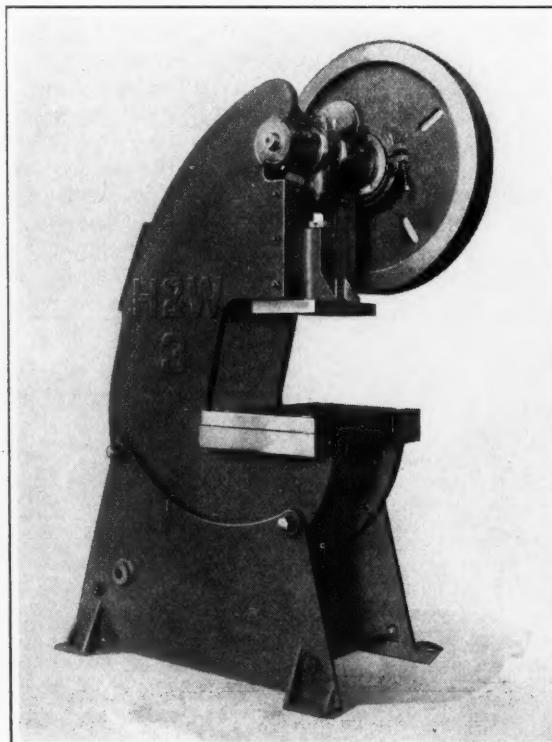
Inclinable Press Made up of Fabricated Units Annealed before Machining
